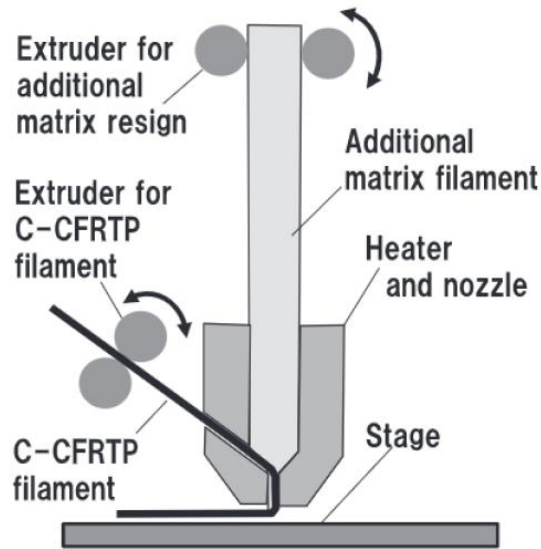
Schematic of the 3D printer head used to print test specimens [25]
